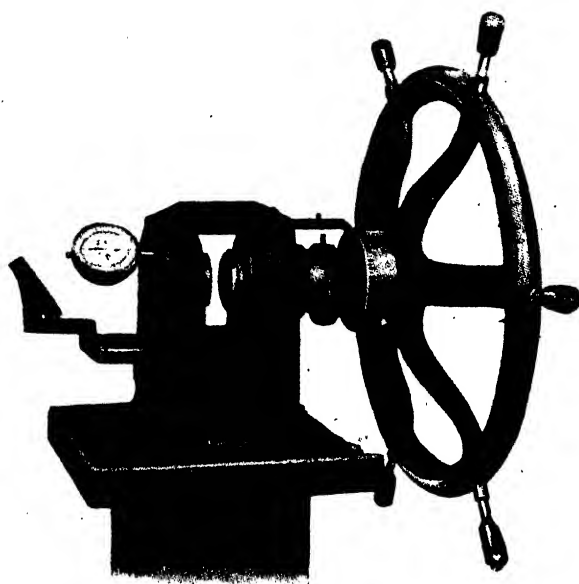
Standard Erichsen Model I machine equipped with manometer gauge for indicating punch-pressure.
